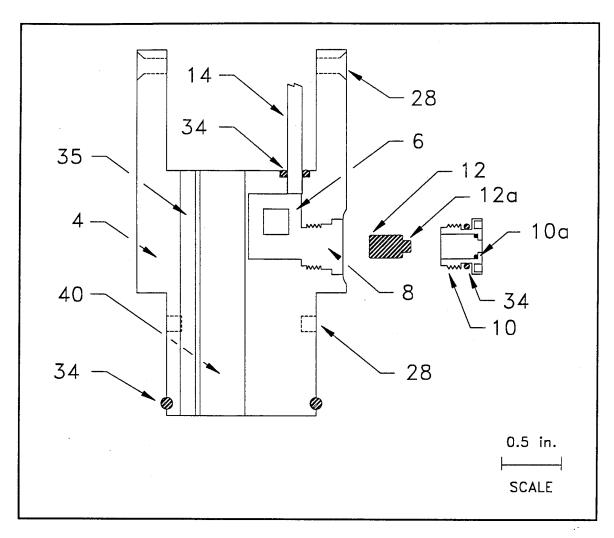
Section view of the MPS module showing the internal configuration of the module. The numbers are identified in the text
